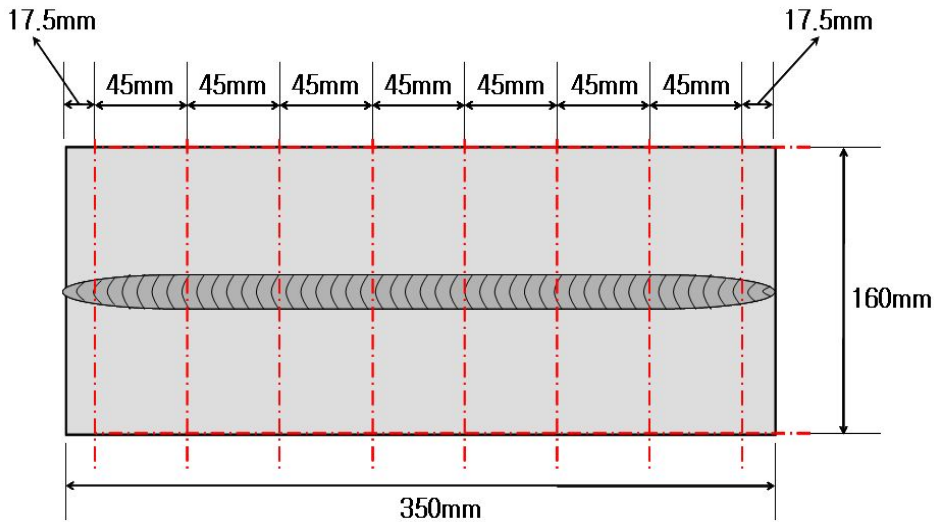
Schematic illustration of bead weld specimen
